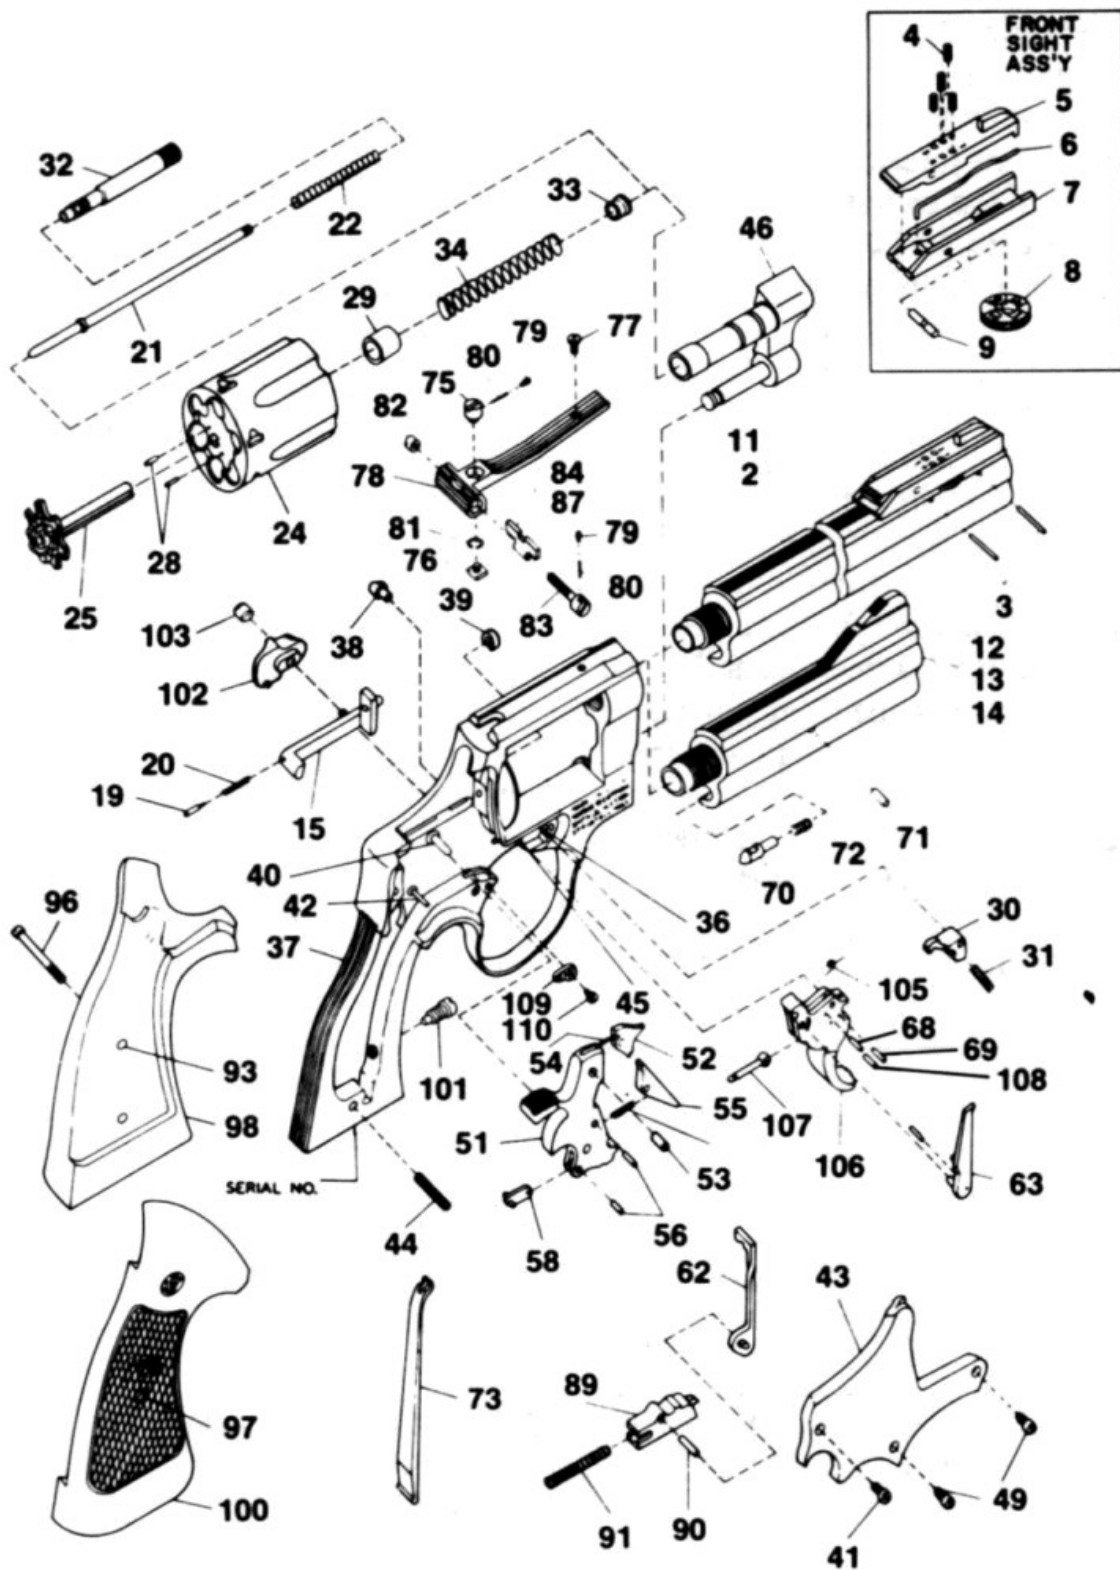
Exploded view of a Smith & Wesson revolver.
